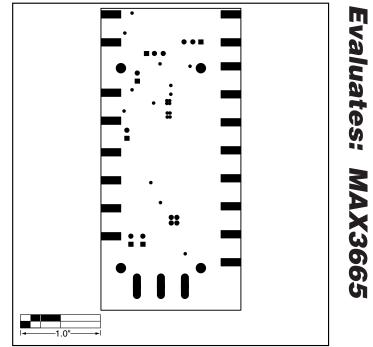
MAX3665 EV Kit PC Board Layout—Solder Side
